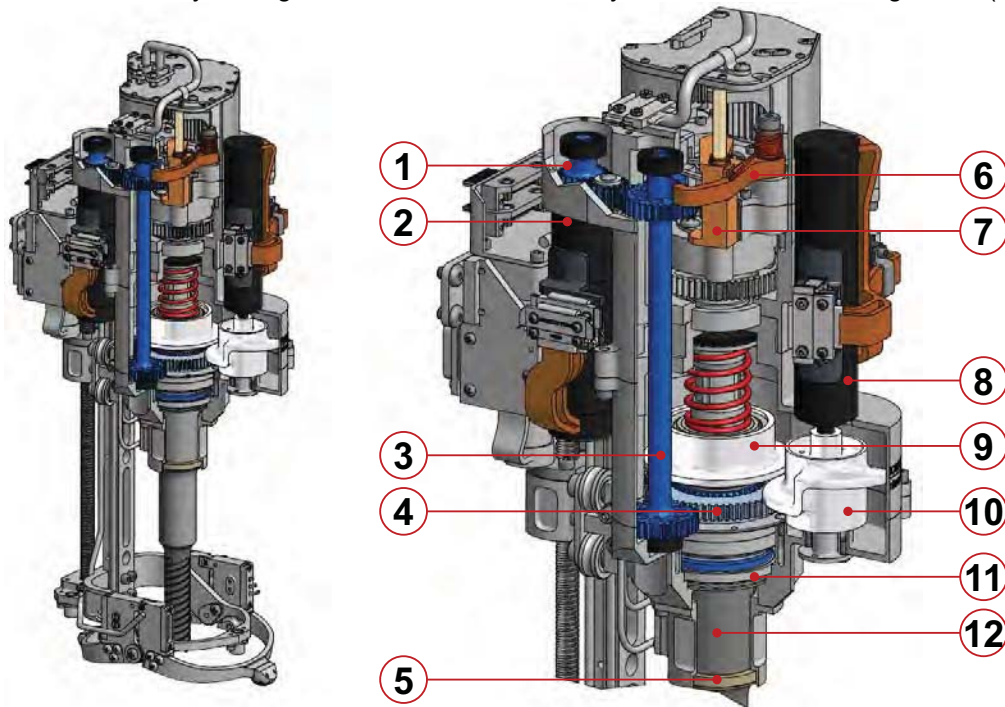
Assembled ROPEC Drill without Flex Cable
